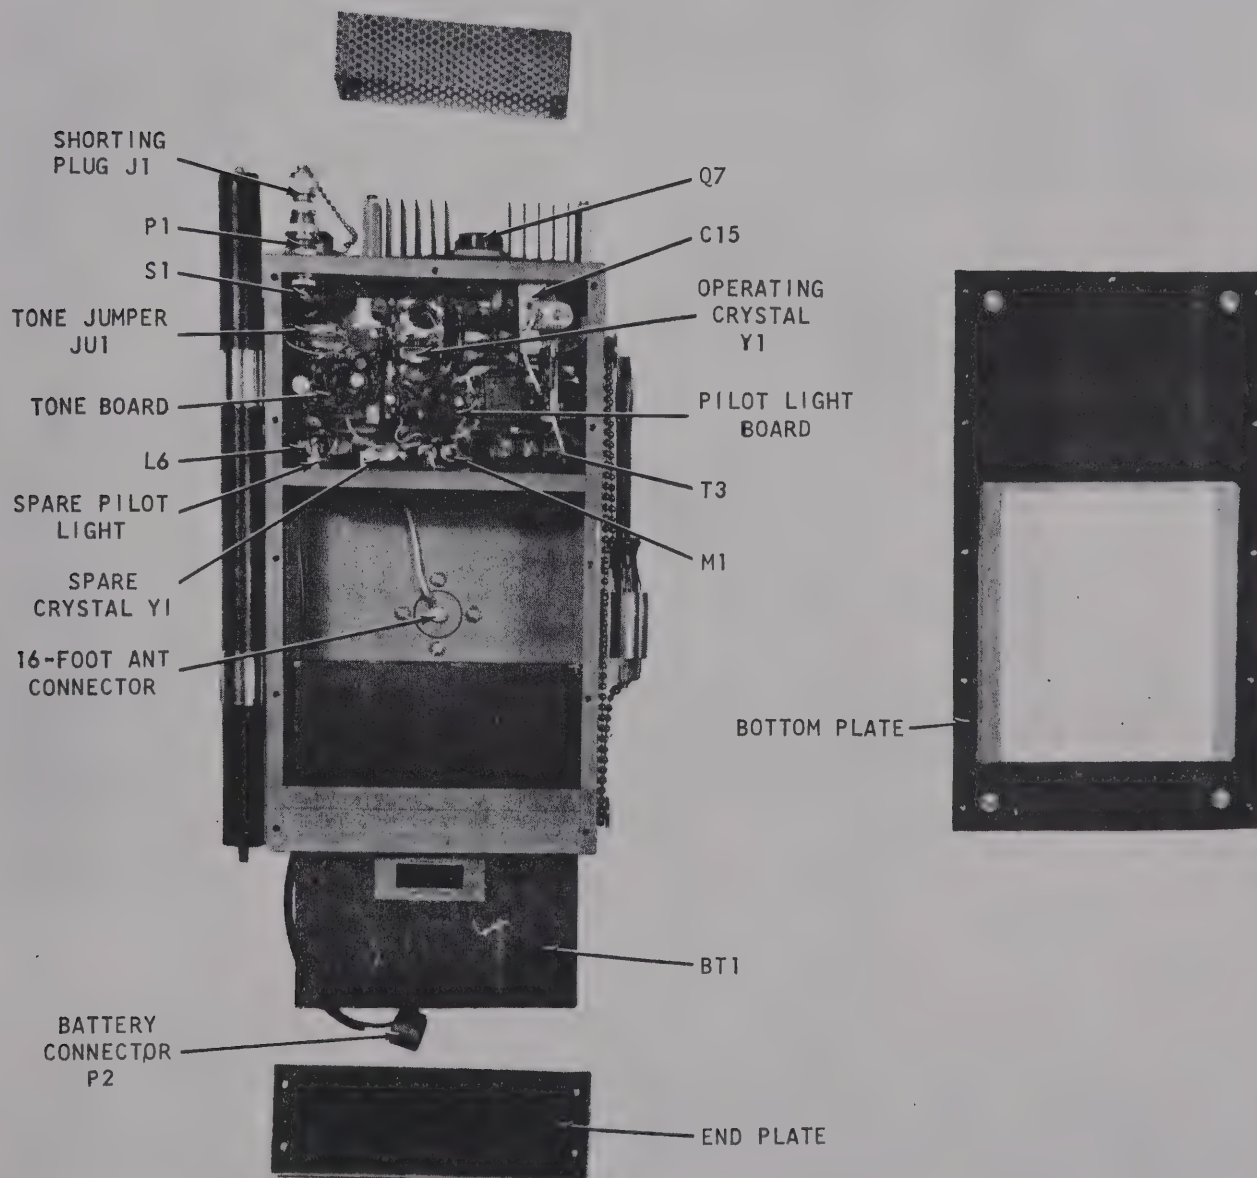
Transmitter, Bottom View with Bottom Plate Removed
